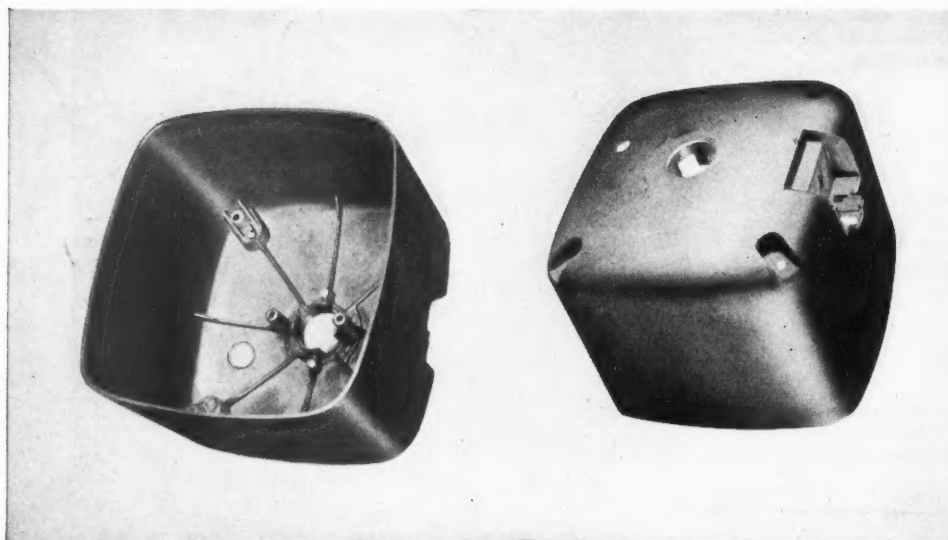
One of the largest castings made in a hobbled cavity. The cavity is about 8 inches square by 5 inches deep
